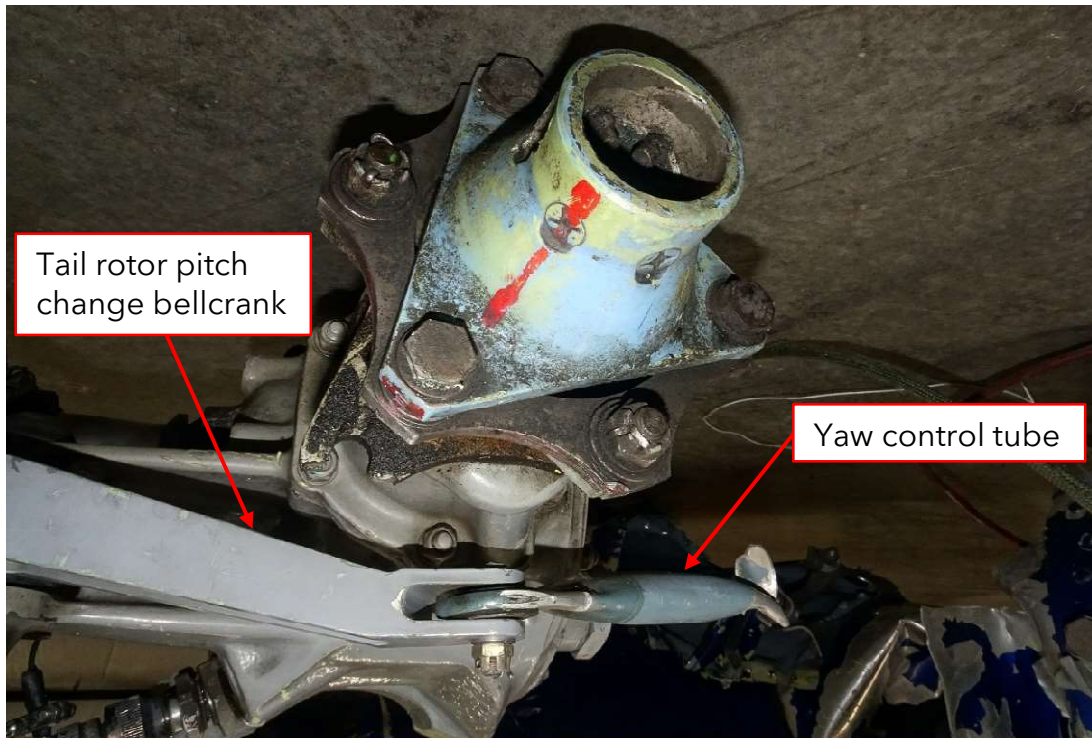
The yaw control tube installed on the tail rotor pitch change bellcrank.
